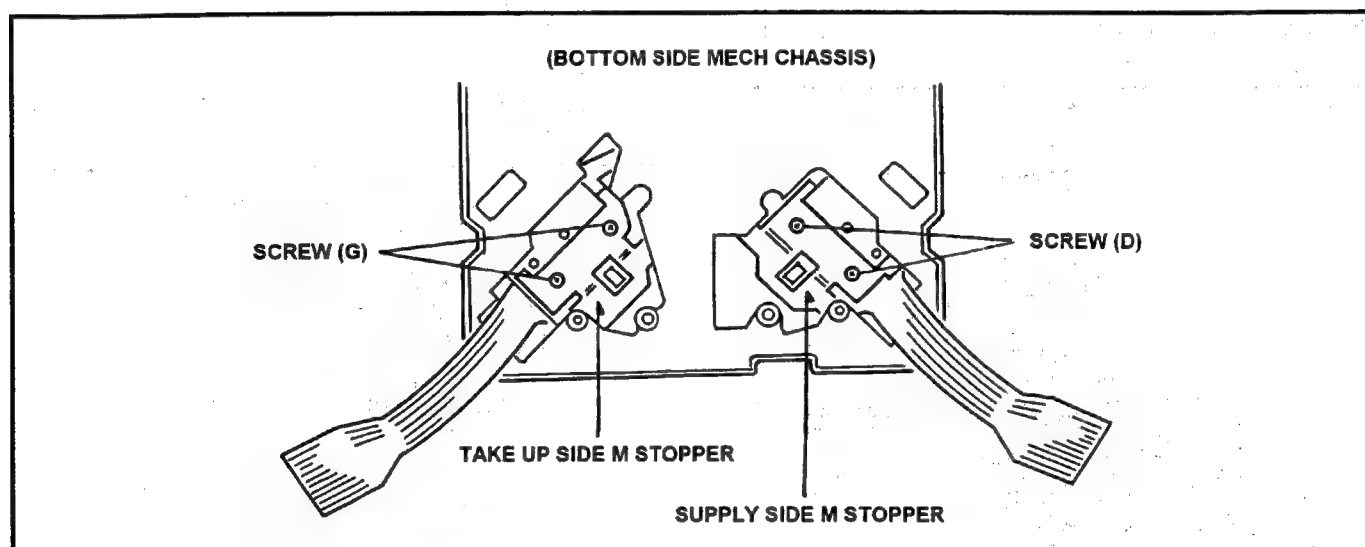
Removal of Supply & Take Reel Rotor Unit
